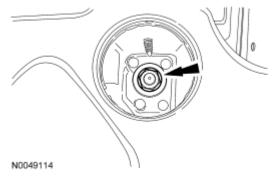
Engine Mount Nut Courtesy of FORD MOTOR CO.
